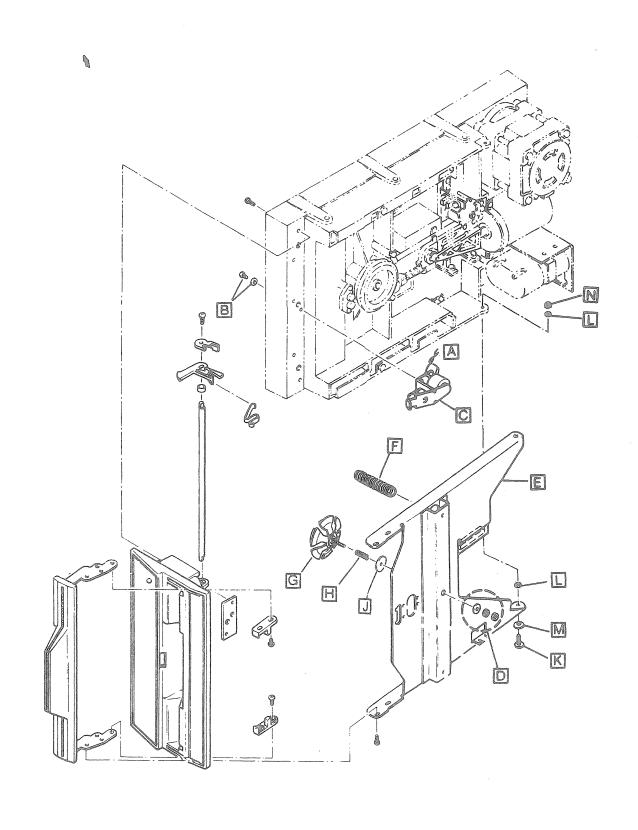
PROGRAM CONTROLLED DOOR LOCK, CLAMP, AND CARRIER ASSEMBLIES REMOVAL AND REPLACEMENT
